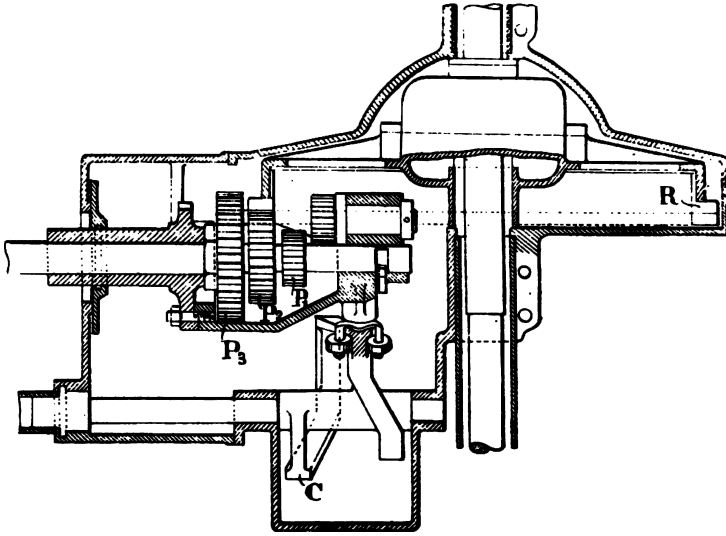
Sizair Naudin gearbox of 1907. This design can be assimilated to a sliding train gearbox, with bevel gears. The single sliding train made by wheels P1, P2 and P3 is mounted on a swinging bearing to mesh the driving shaft at different distances with the big output front teeth wheel.
